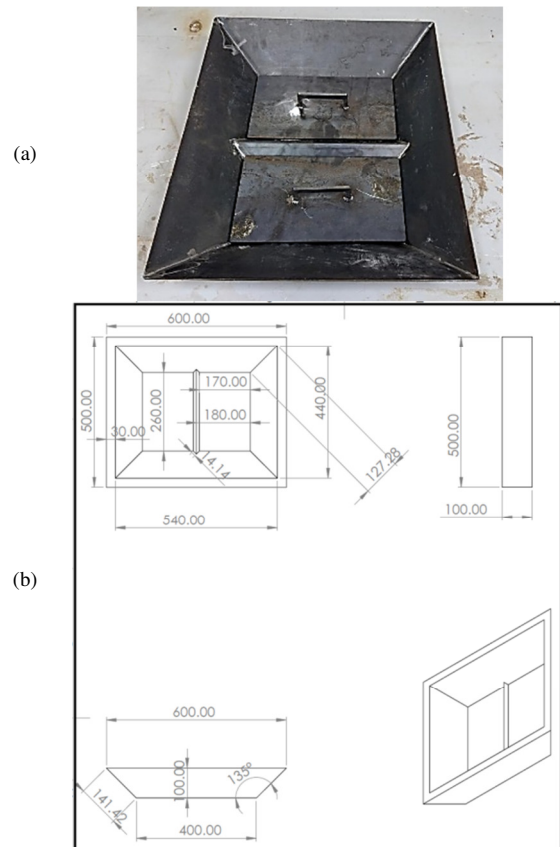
(a) Closed mold for the laminates and (b) drawing of the mold (b). The dimensions are in mm.
